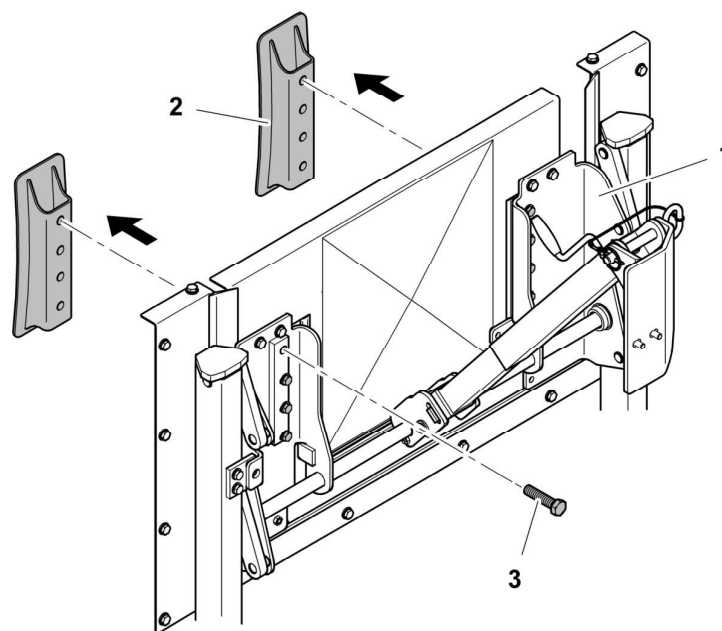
Attach the spindle support to the Diesel Exhaust Fluid (DEF) tank
